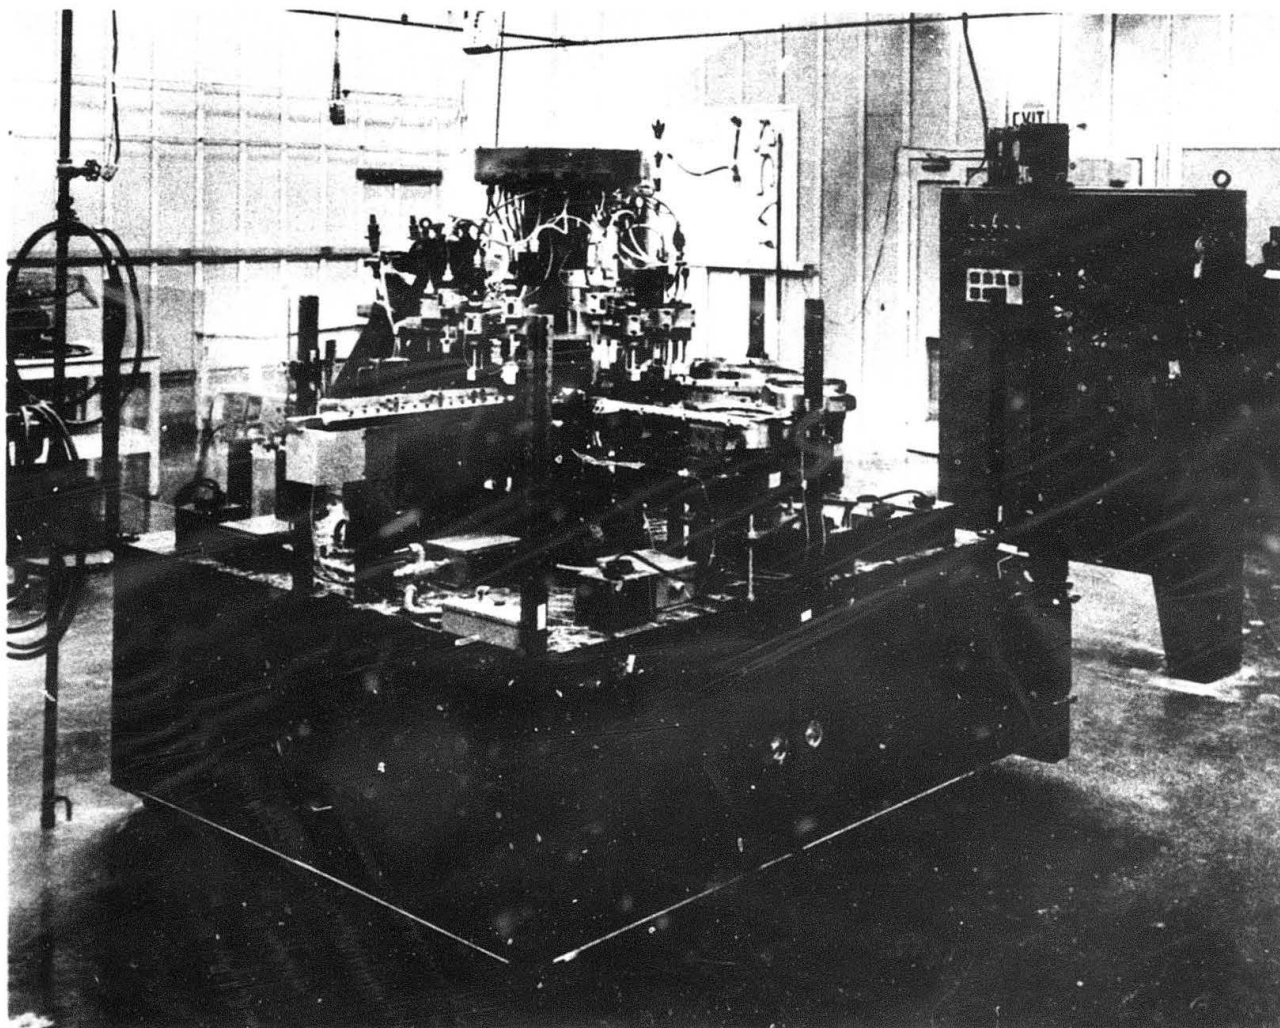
FINAL FUZE ASSEMBLY MACHINE
